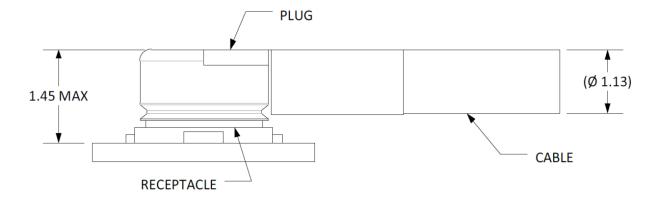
Space Factor of Mated Connectors (Ø 1.13 mm Coaxial Cables) (Unit: mm)
